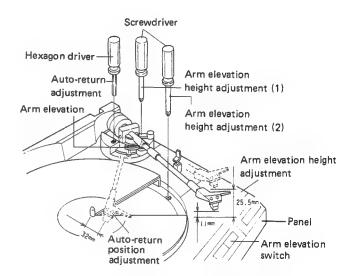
Arm elevation height adjustment and auto-return adjustment
